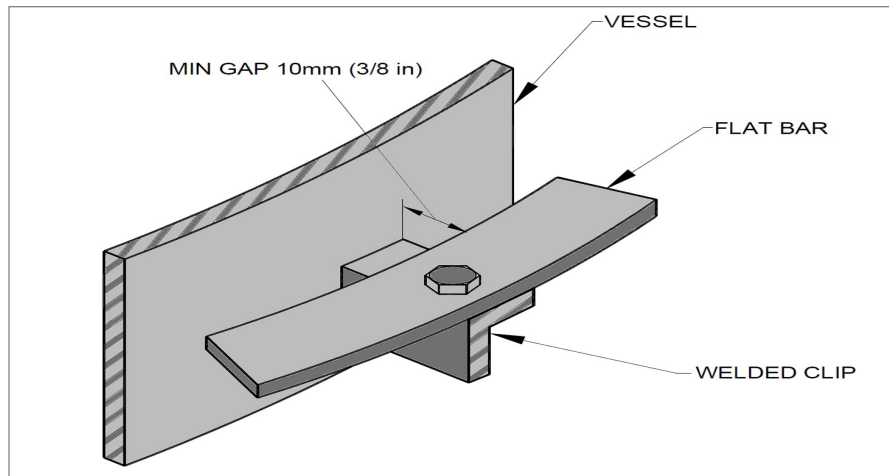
Recommended Insulation Support Ring Detail to Facilitate Water Drainage Between the Vessel Wall and the Ring (adapted from [1]).
